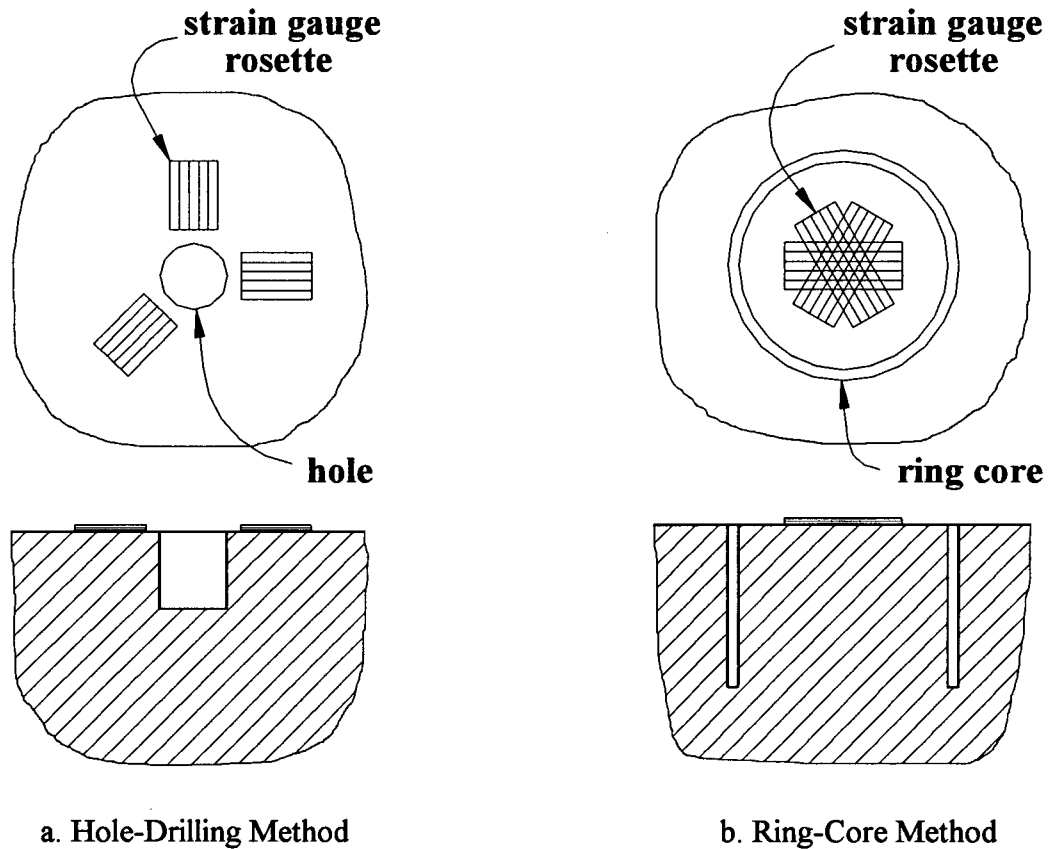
Hole-Drilling and Ring-Core Methods.
